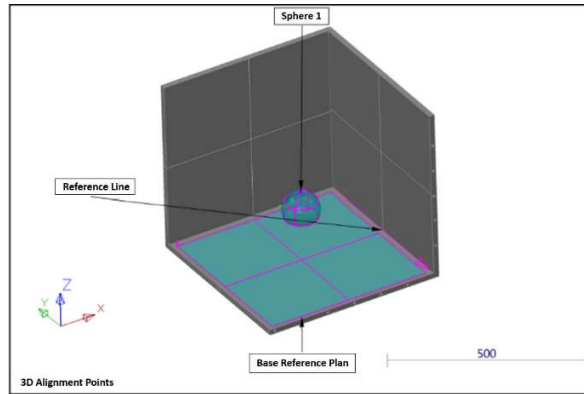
Diagram showing the three perpendicular faces of the three-dimensional part manufactured for TLS measurement.
